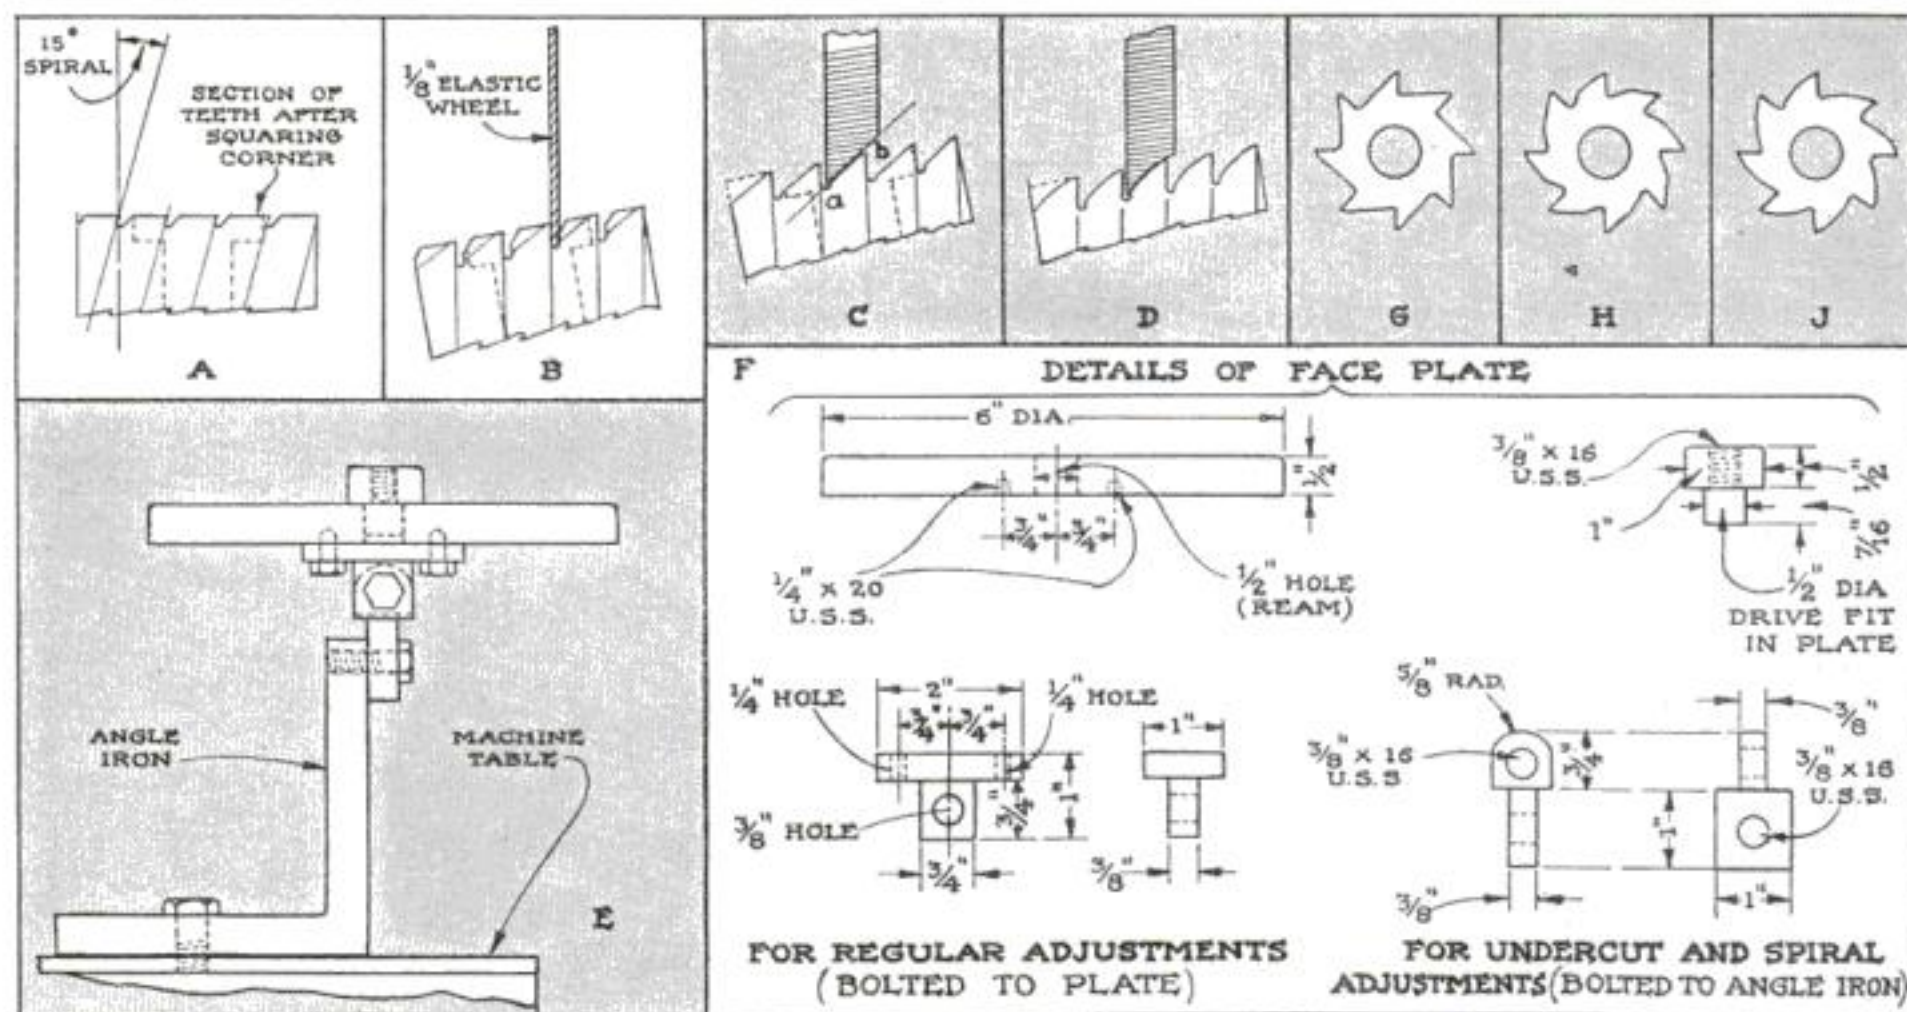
(A to D) Steps in salvaging shell end mills. (E) A grinding fixture and (F) details of parts. (G to J) Three common shapes of teeth.
